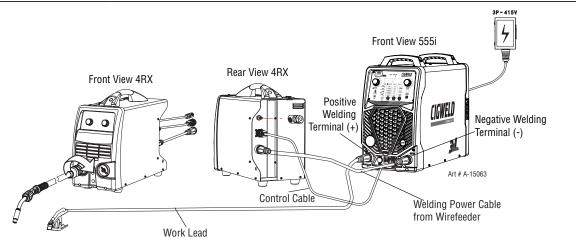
Setup for MIG (GMAW) Welding with Gasless Mig Wire
